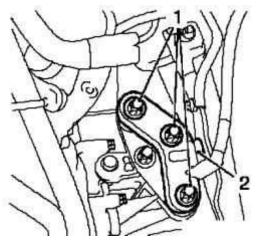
Left damping motor unit: 1 - damping block; 2 - bolts fixing
